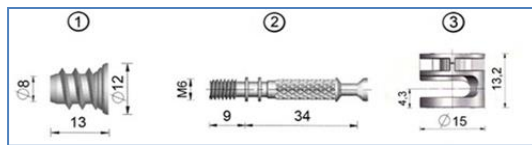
Minifix metal peg fitting (mm) (1. peg, 2. eccentric shaft and 3. eccentric head)
